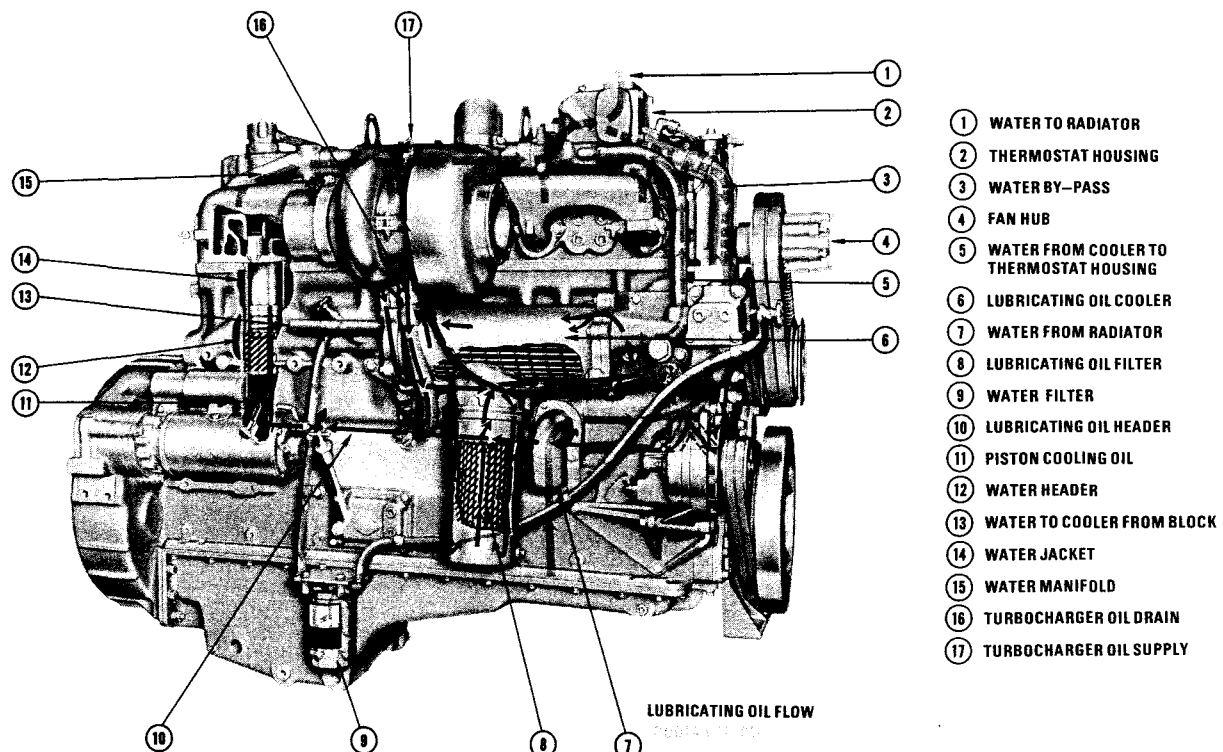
, (LWC-18). Lubricating oil and coolant flow — N/NT-855 Engine
